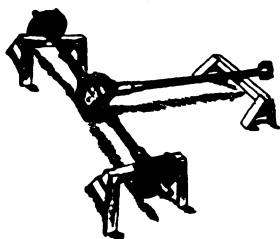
Three horses form a serviceable axle stand, though a special stand could readily be made. Never attempt to dismantle or assemble a part on the floor but get the work up where it is accessible and clean.
